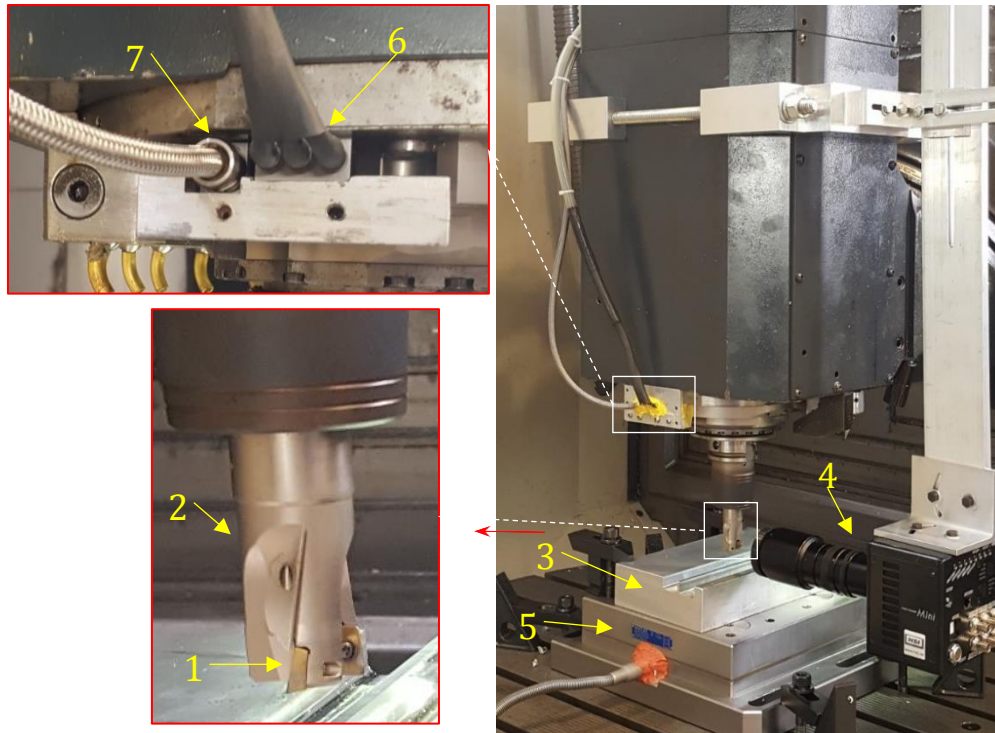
Experimental setup for milling (1) cutting insert, (2) tool holder, (3) workpiece, (4) HSC, (5) dynamometer, (6) accelerometer and (7) AE sensor
